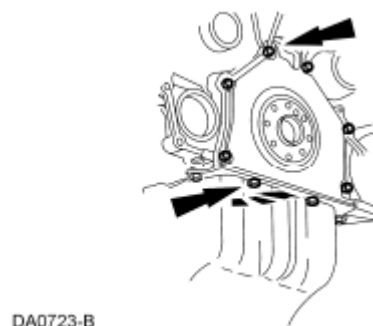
Locating Crankshaft Rear Seal Retainer Plate And Bolts
